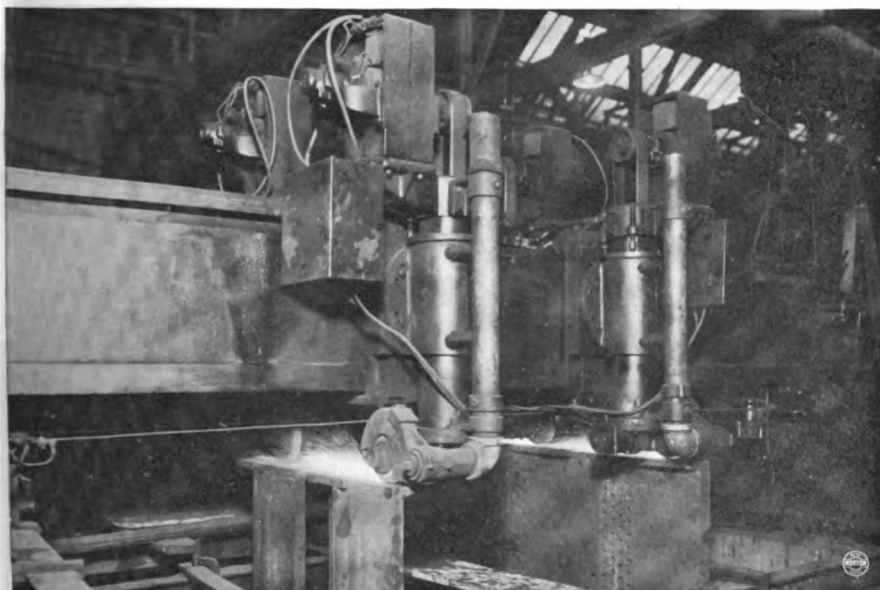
A pit grinding machine, mounting four Alundum wheels, shown grinding the ends of ball mill plates used in a cement grinding machine
